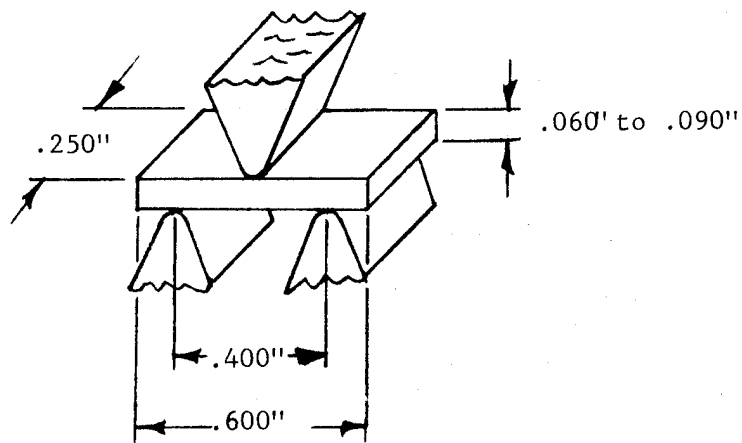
UNIDIRECTIONAL SHORT BEAM SHEAR SPECIMEN
